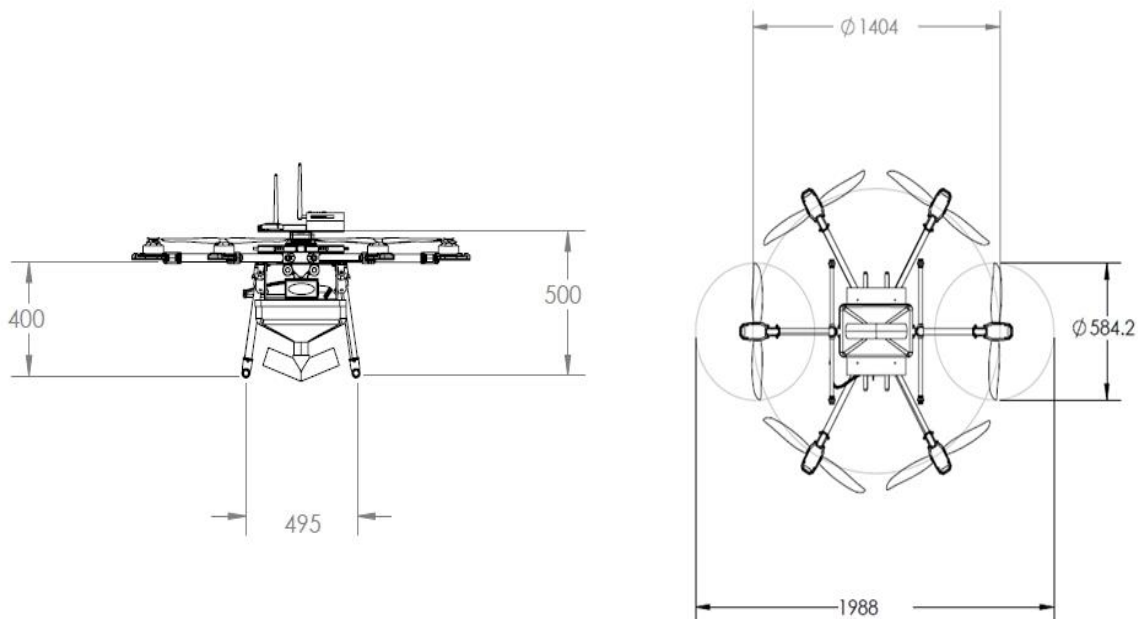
Dimensions of Drone and Fertilizer Assembly
